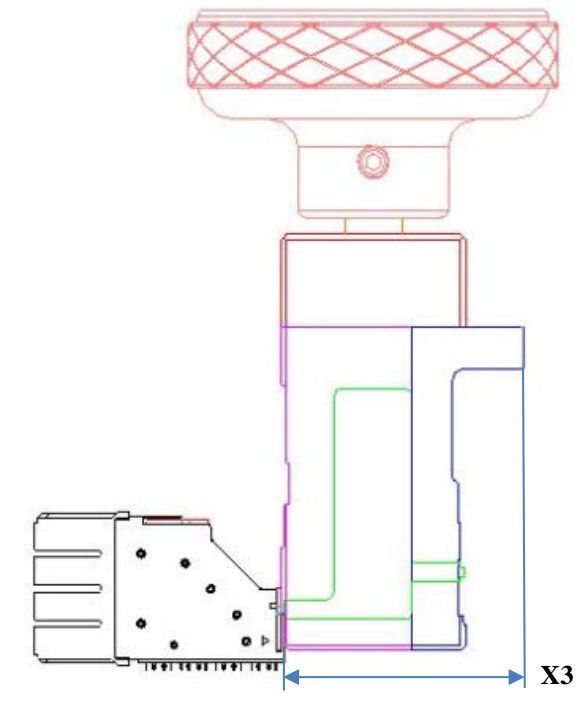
X dimension for stiffener removal tool from the surface of the PCB [X3]
